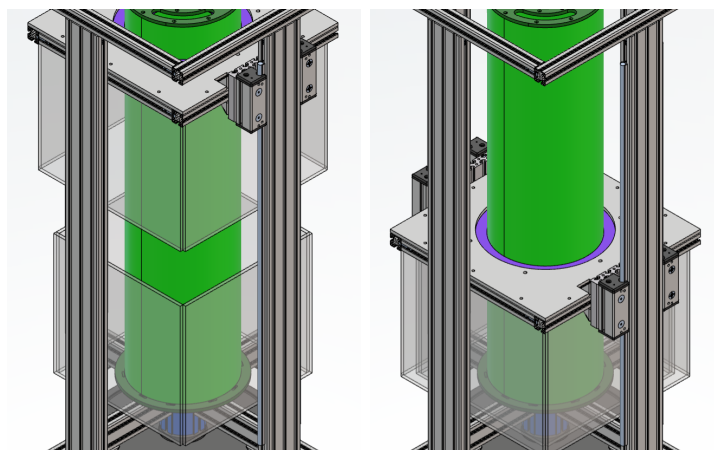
Completed setup of the Helical Winder Demonstrator, excluding heating method
